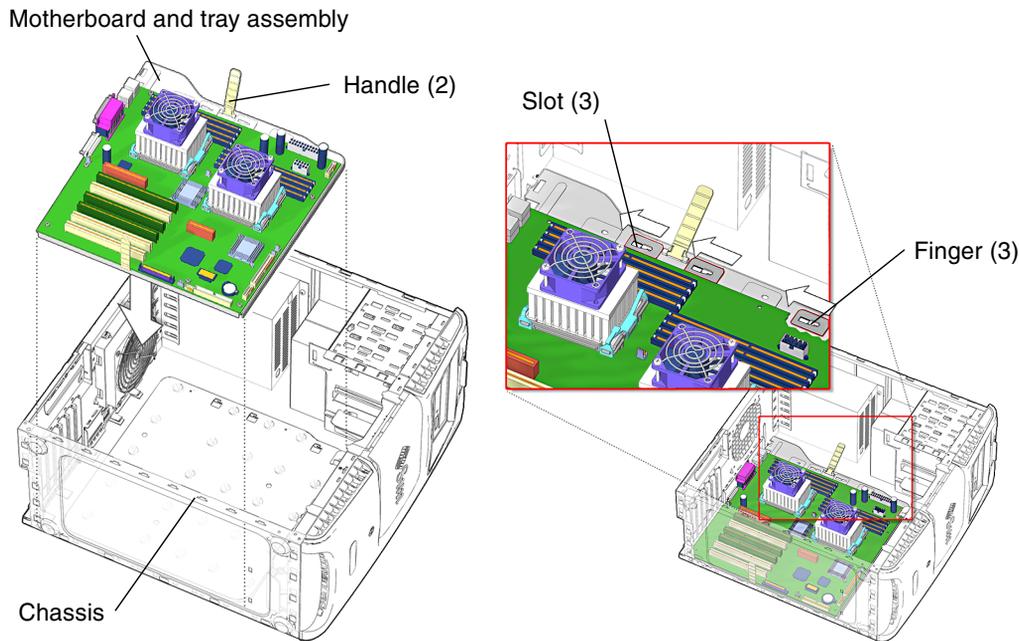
Inserting the Motherboard and Tray Assembly Into the Chassis
